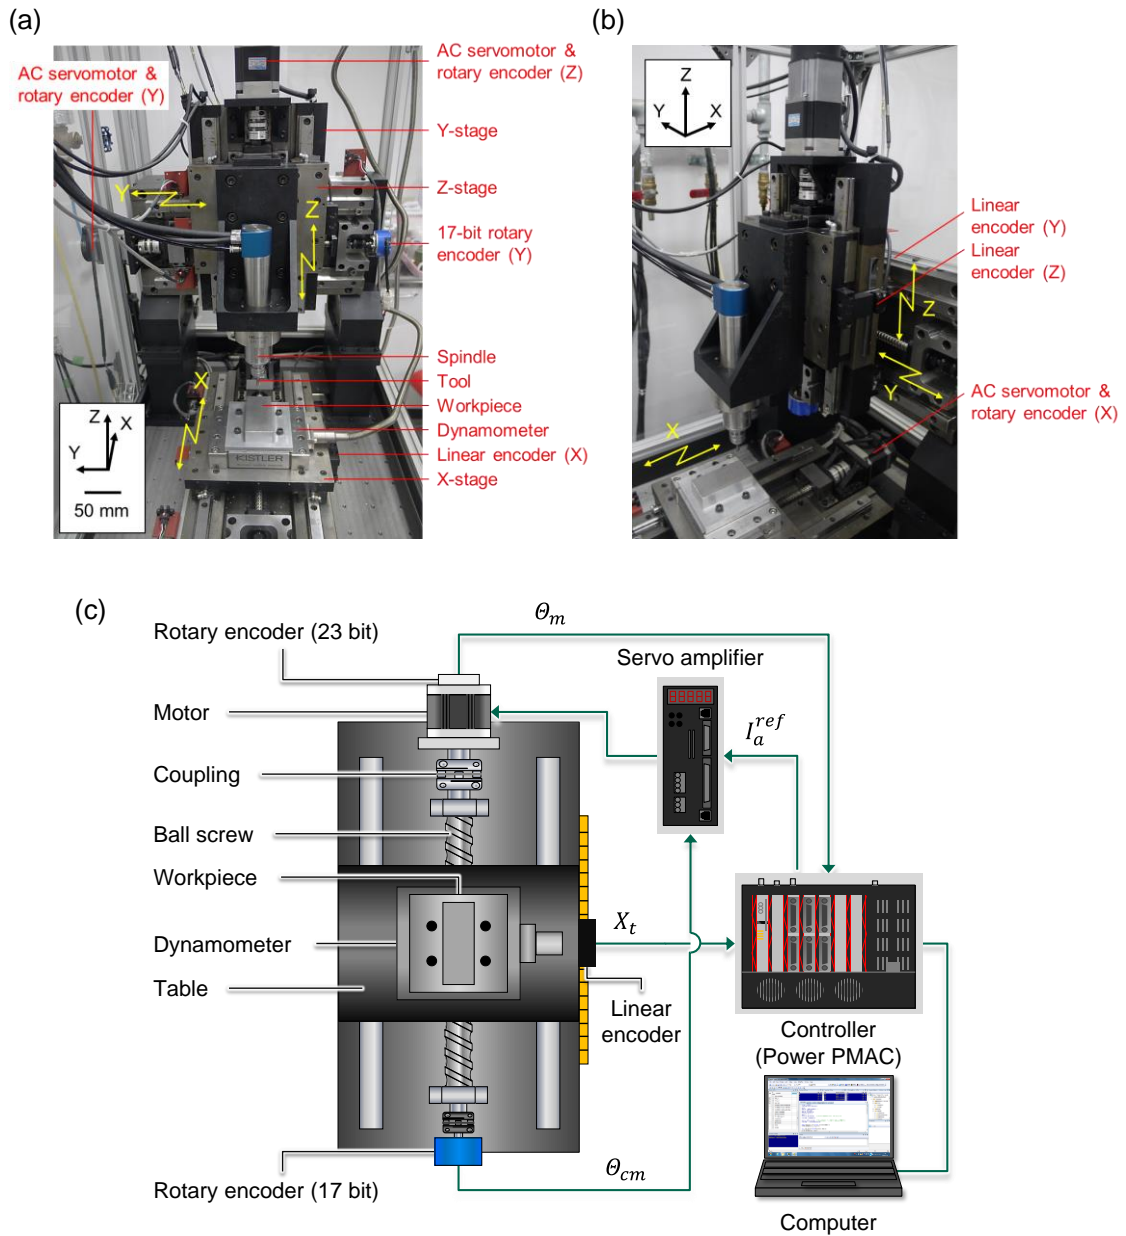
Configuration of prototype three-axis double-column-type machine tool with ball-screw-driven stage: (a) Front view, (b) oblique view, and (c) signal flow of control system
